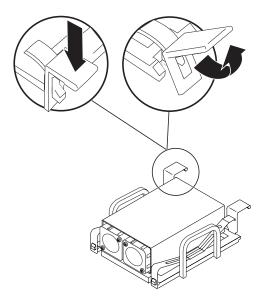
Unlocking the Heat Sink Fasteners
